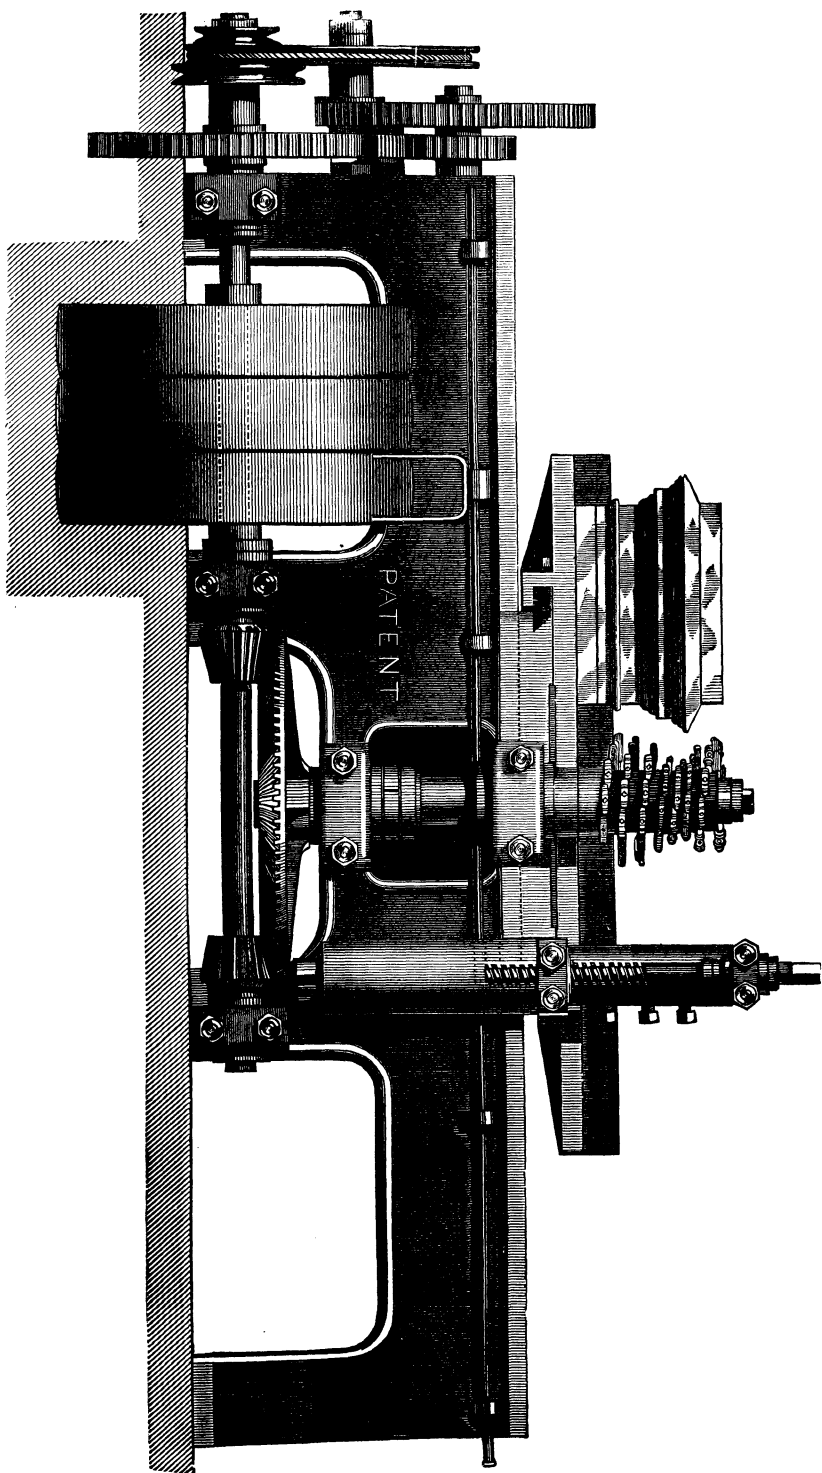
Hunter and Fothergill's stone-sawing machine—end view.
